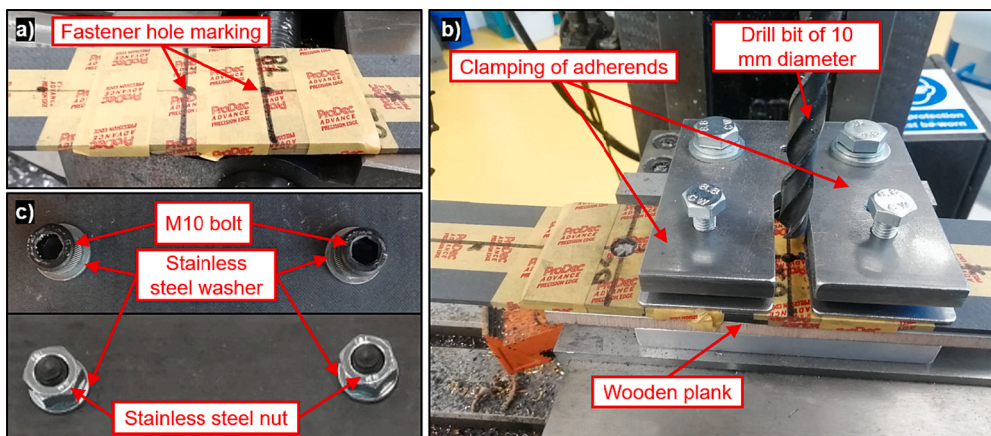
Sequence of activities in the manufacture of OBJs, a) marking the fastener hole locations, b) drilling the fastener holes, c) placing the fasteners and tightening to the torque of 6N.m.
